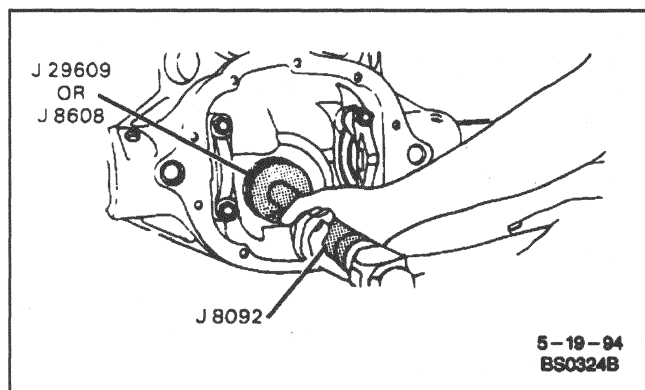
Installing Differential Drive Pinion Gear Inner Bearing Race
